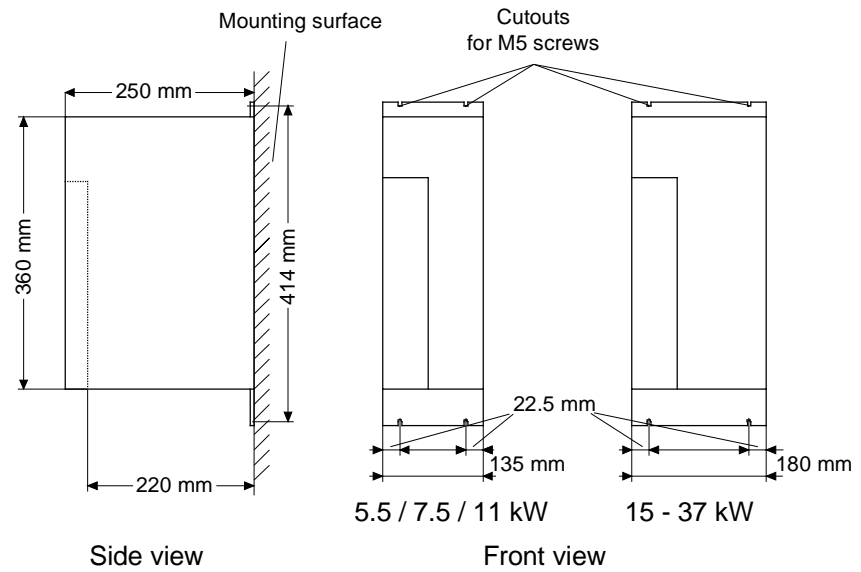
Dimension drawings for housings 135 mm and 180 mm wide
